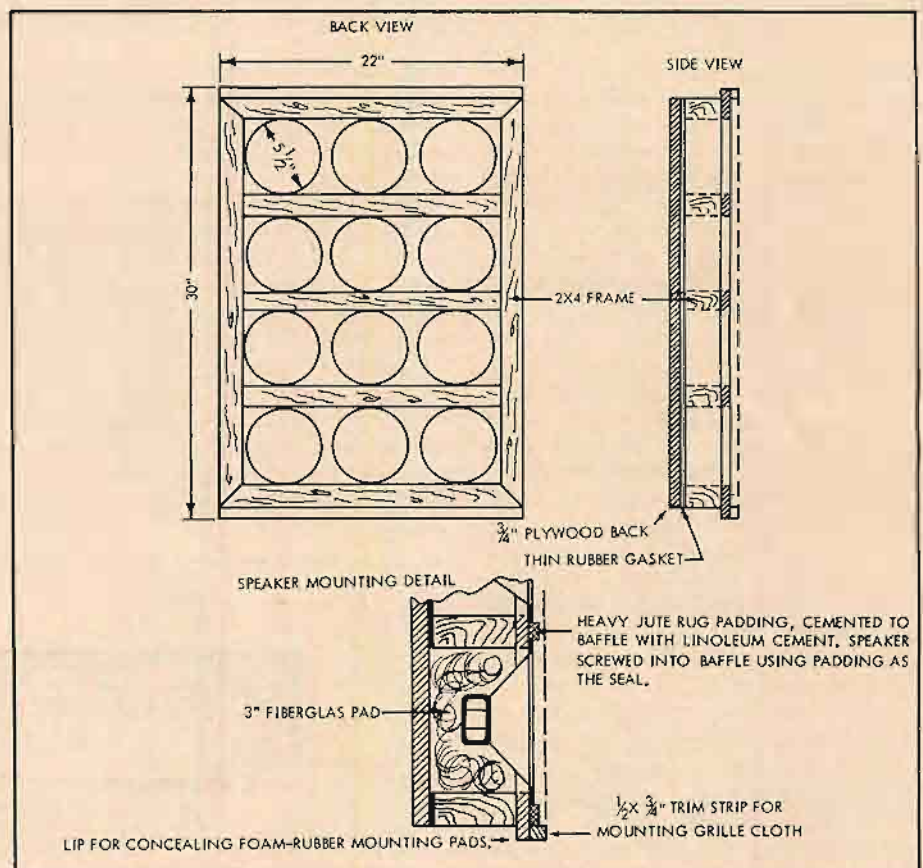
Details of speaker mounting and construction of the enclosure for a 3 x 4 array.
